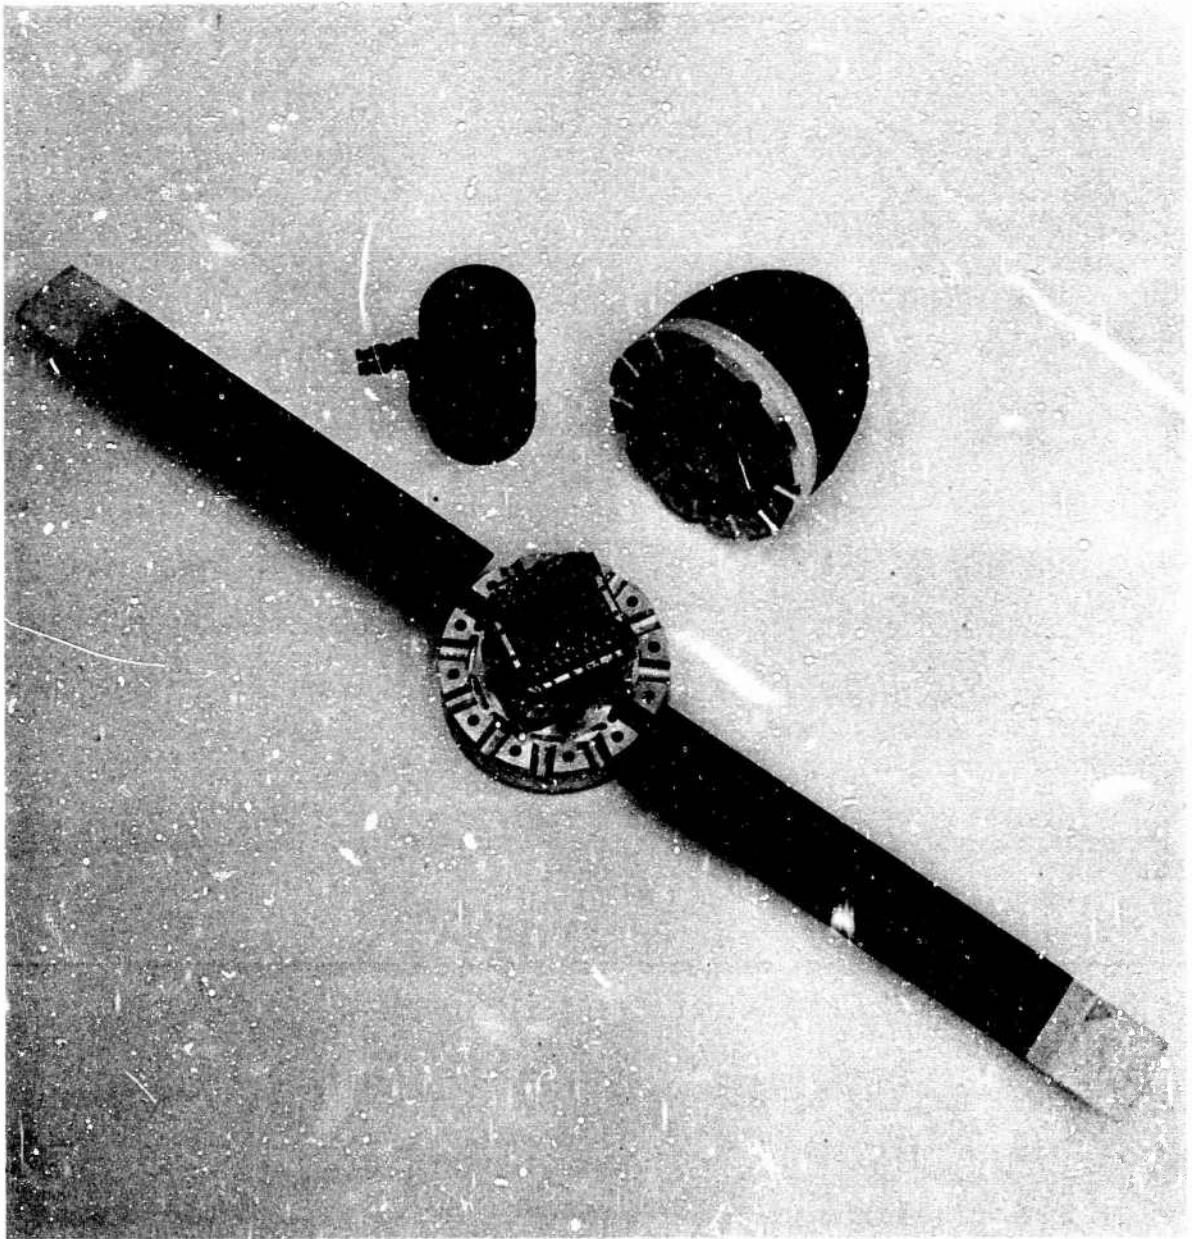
Photograph of the Wyle 2-Blade Propeller showing the Amplifier Package and Slip-Ring Assembly
